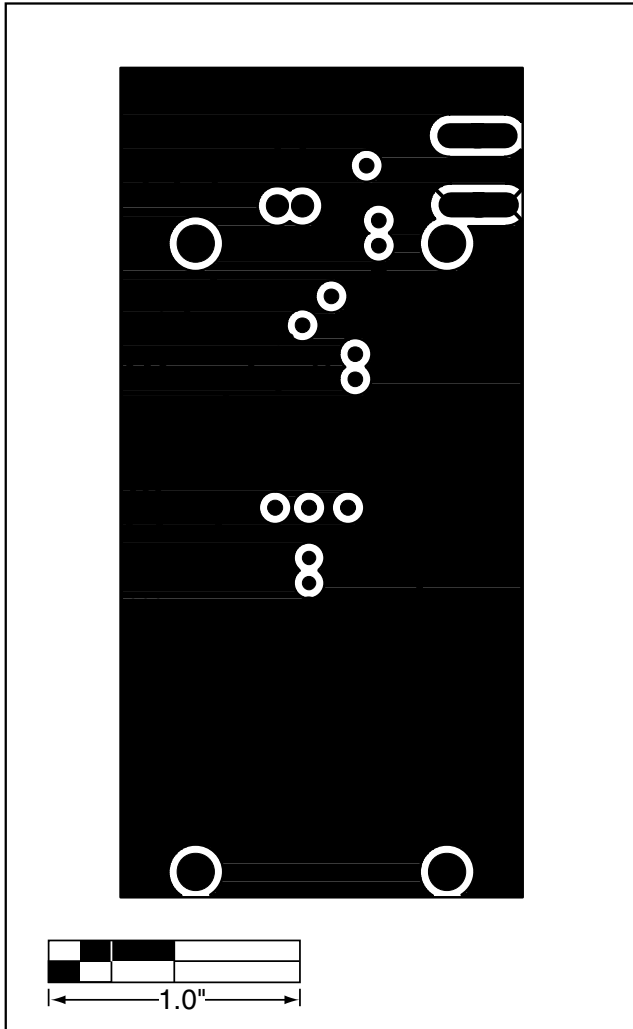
MAX3971 EV Kit PC Board Layout—Ground Plane
